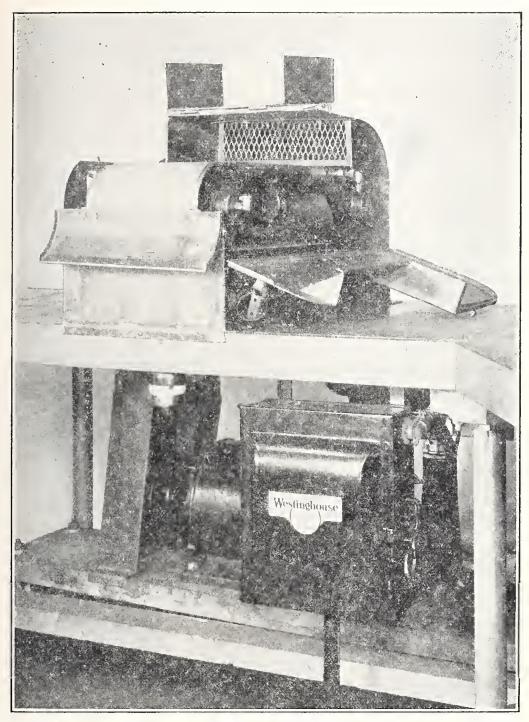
FRONT VIEW OF SANDER SHOWING FACILITY WITH WHICH HINGED SECTIONS OF GUARD MAY BE THROWN OPEN
